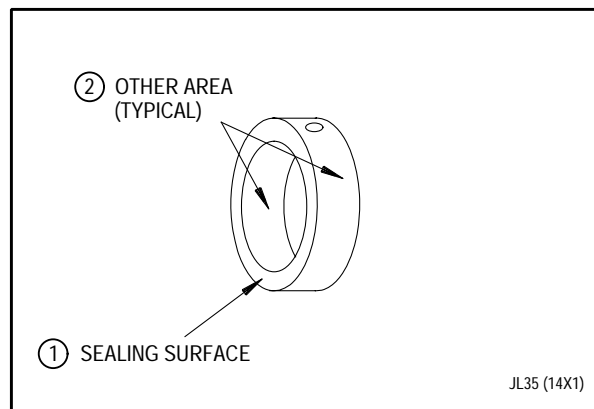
Gearbox Module Seal Assemblies - Inspection
